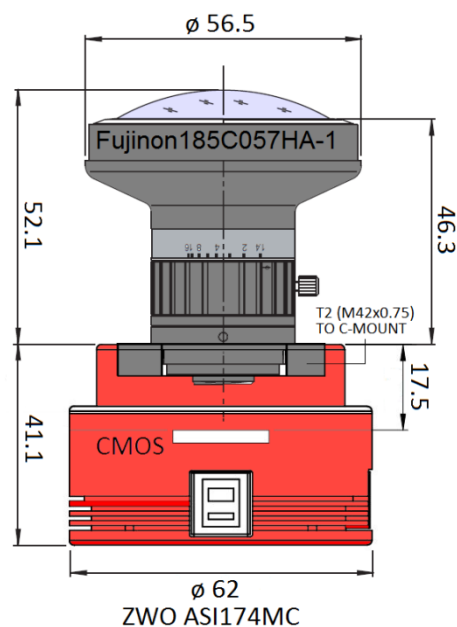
Drawing of the ZWO ASI174MC camera head and the Fujinon F/1.4 all-sky lens. All measurements are in mm.
